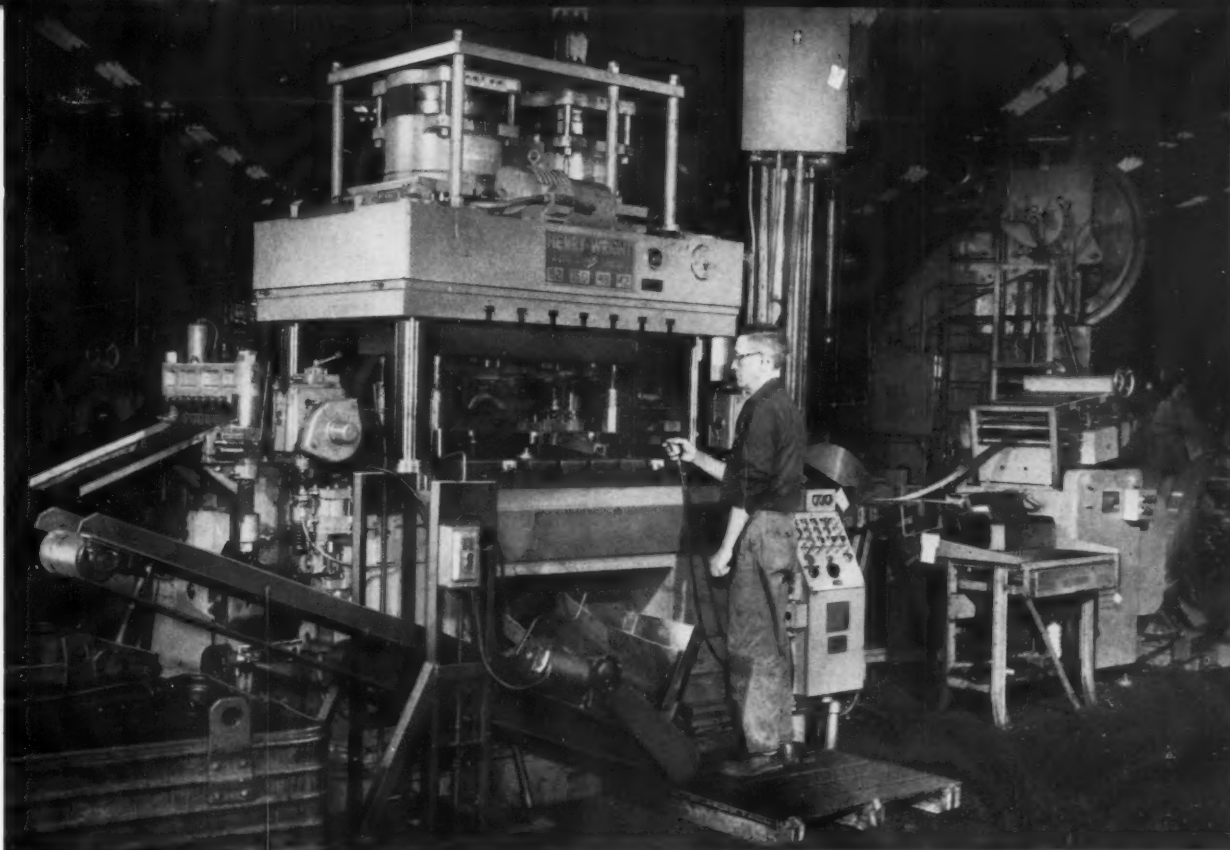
Hood bumper bracket of 0.075-inch thick mild steel is blanked and formed in a ten-station progressive die on a 150-ton, double-crank dieing machine.
